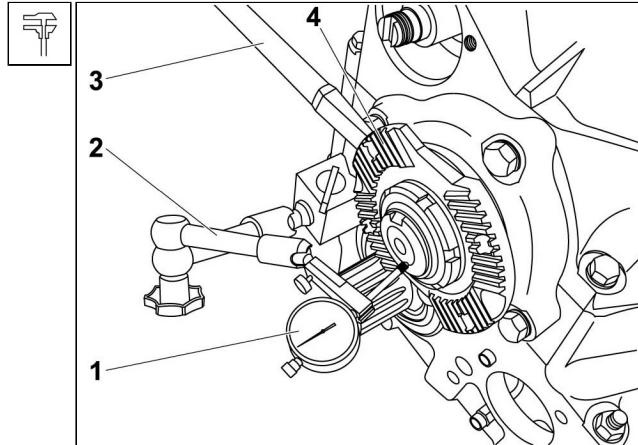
Inspection of the input shaft axial clearance
